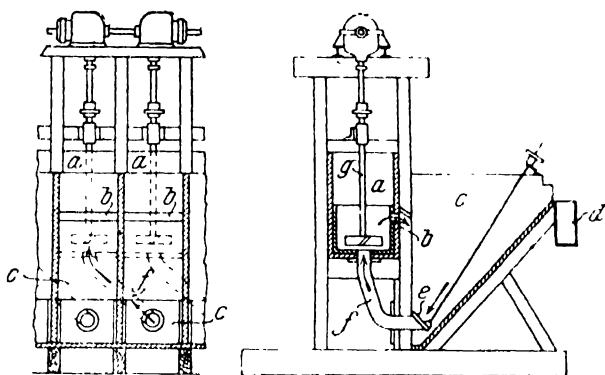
Minerals Separation Plant : Longitudinal and Cross-section.
